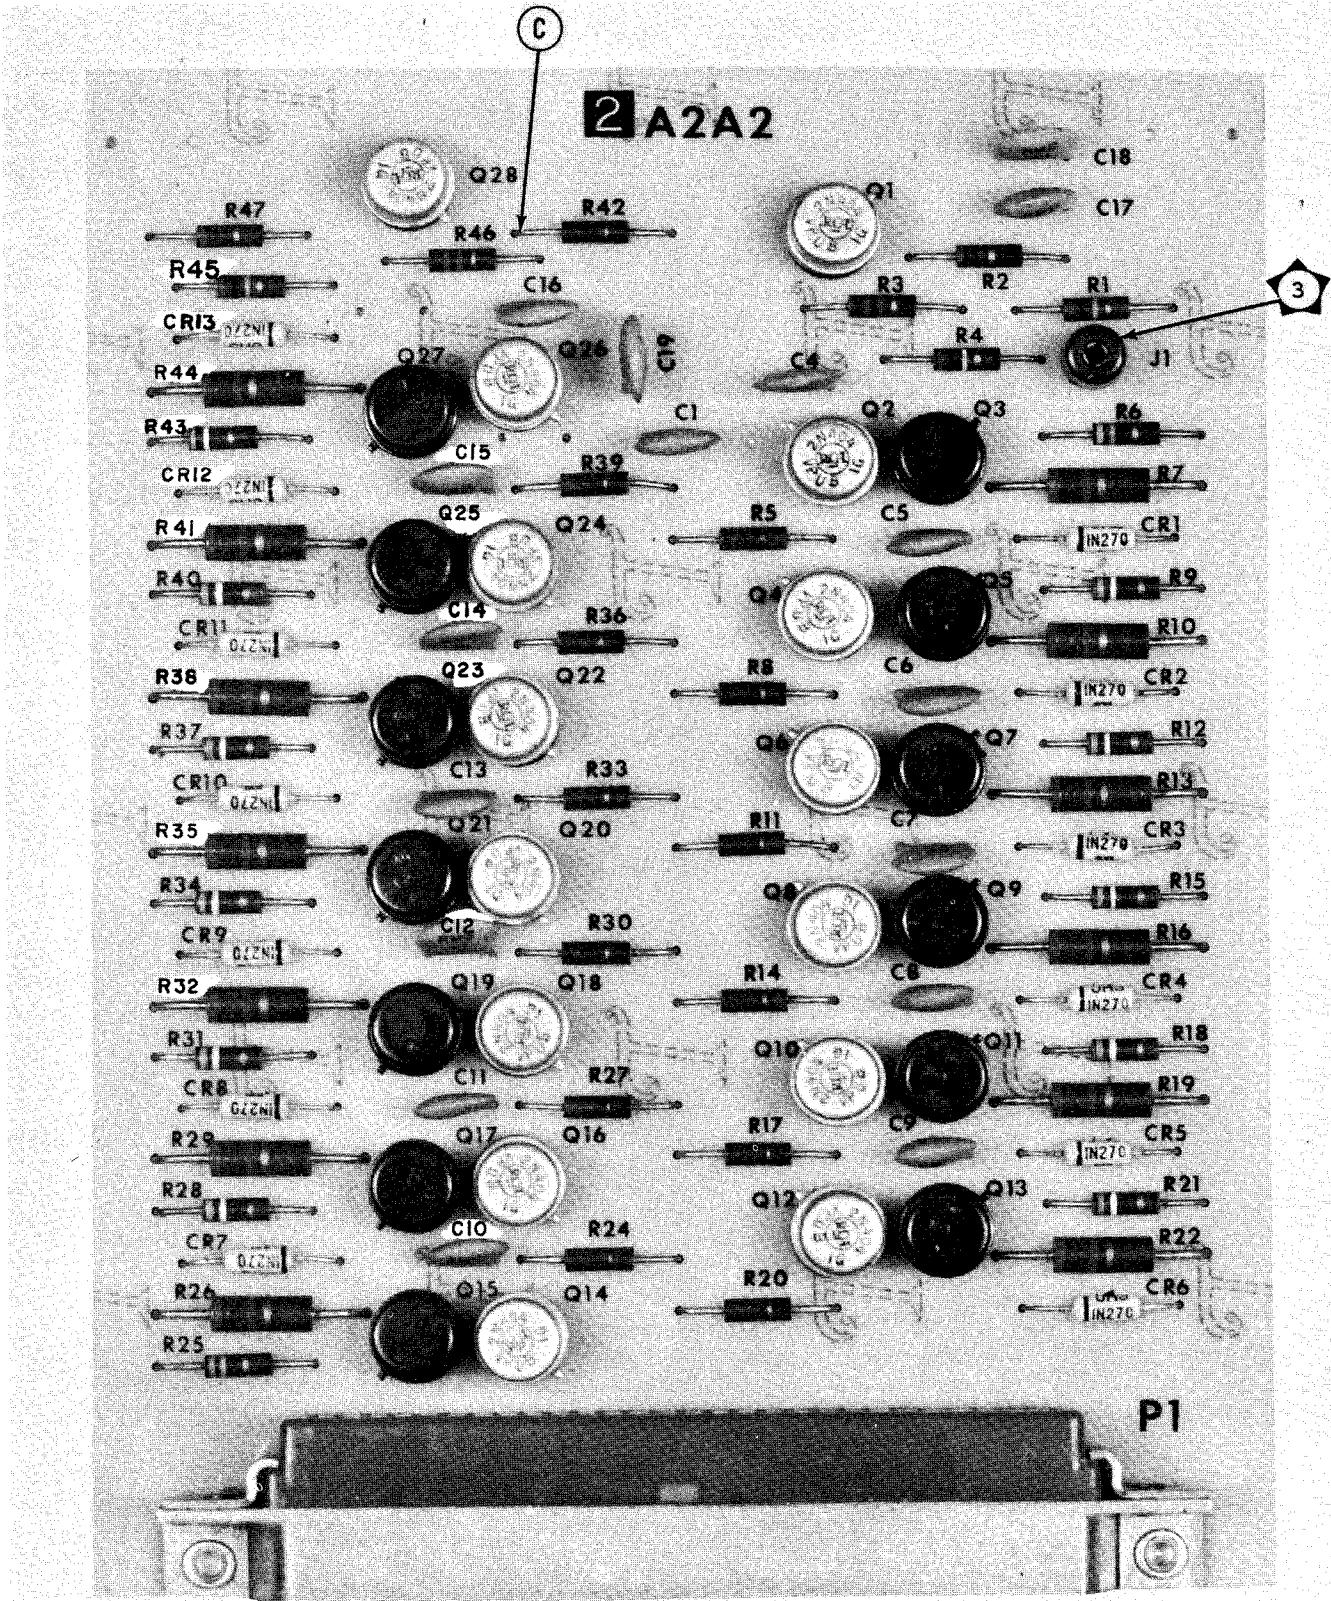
Mux-Demux, Printed Circuit Board A2
